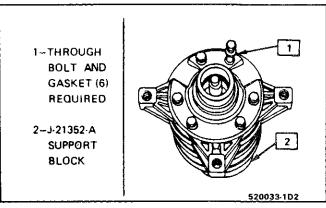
Front Head Installed: Thru Bolts and Gaskets in Place
